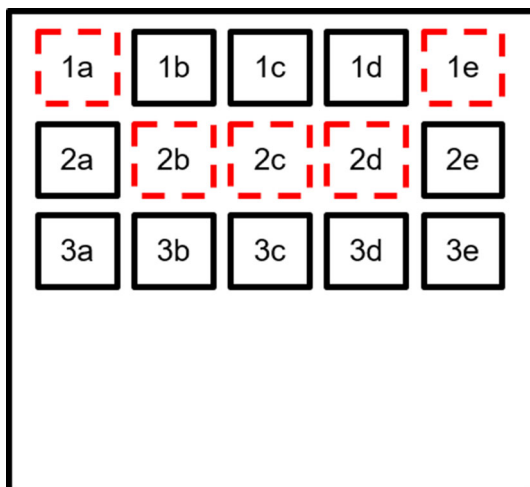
Layout of parts on the build plate of Renishaw AM250 machine.
